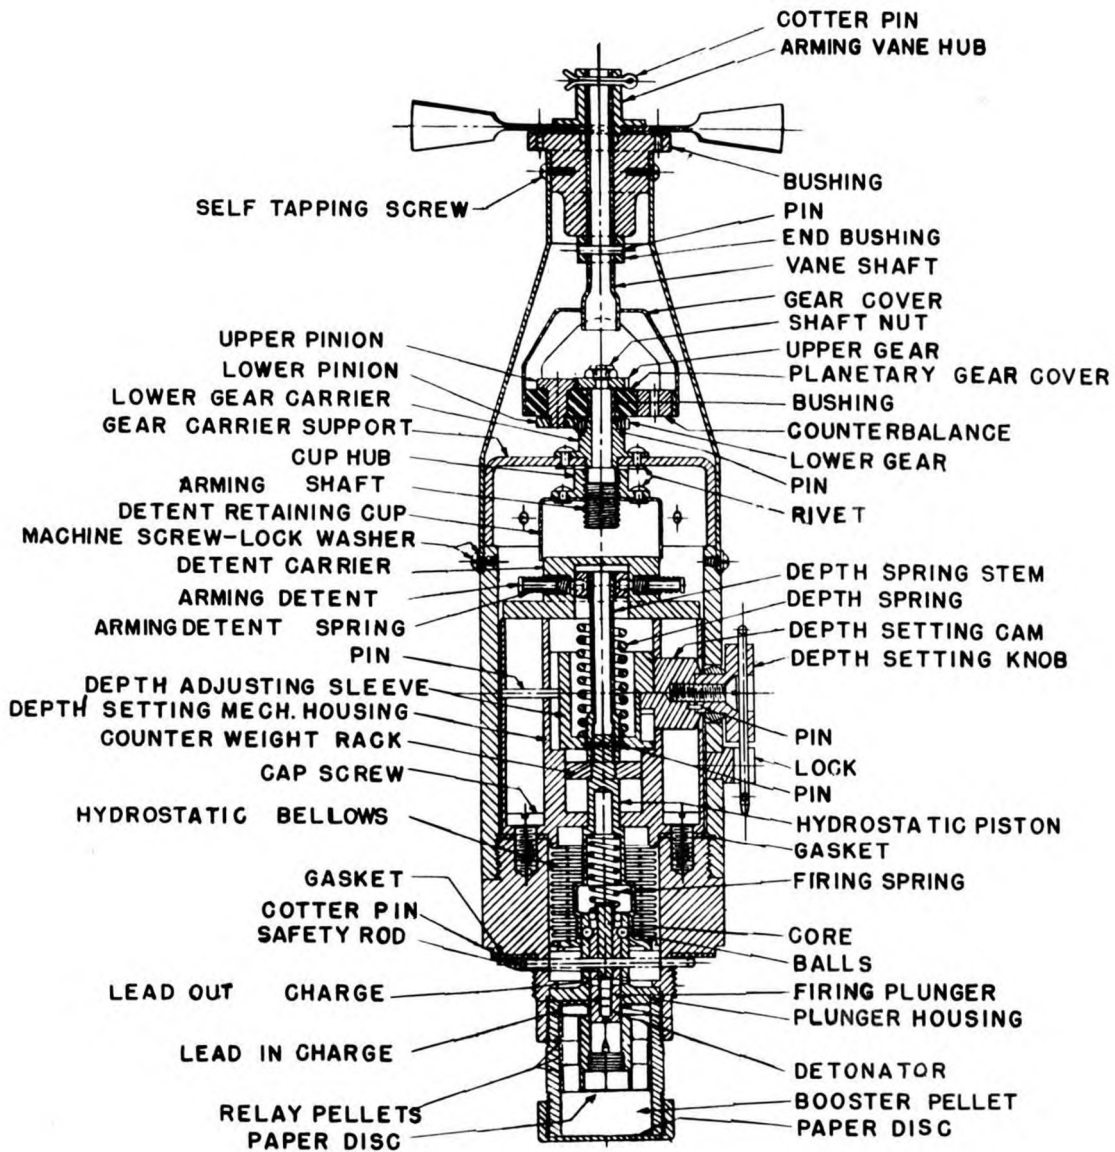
ASSEMBLY OF AN-MK. 230 BOMB FUZE, ARMED POSITION.
